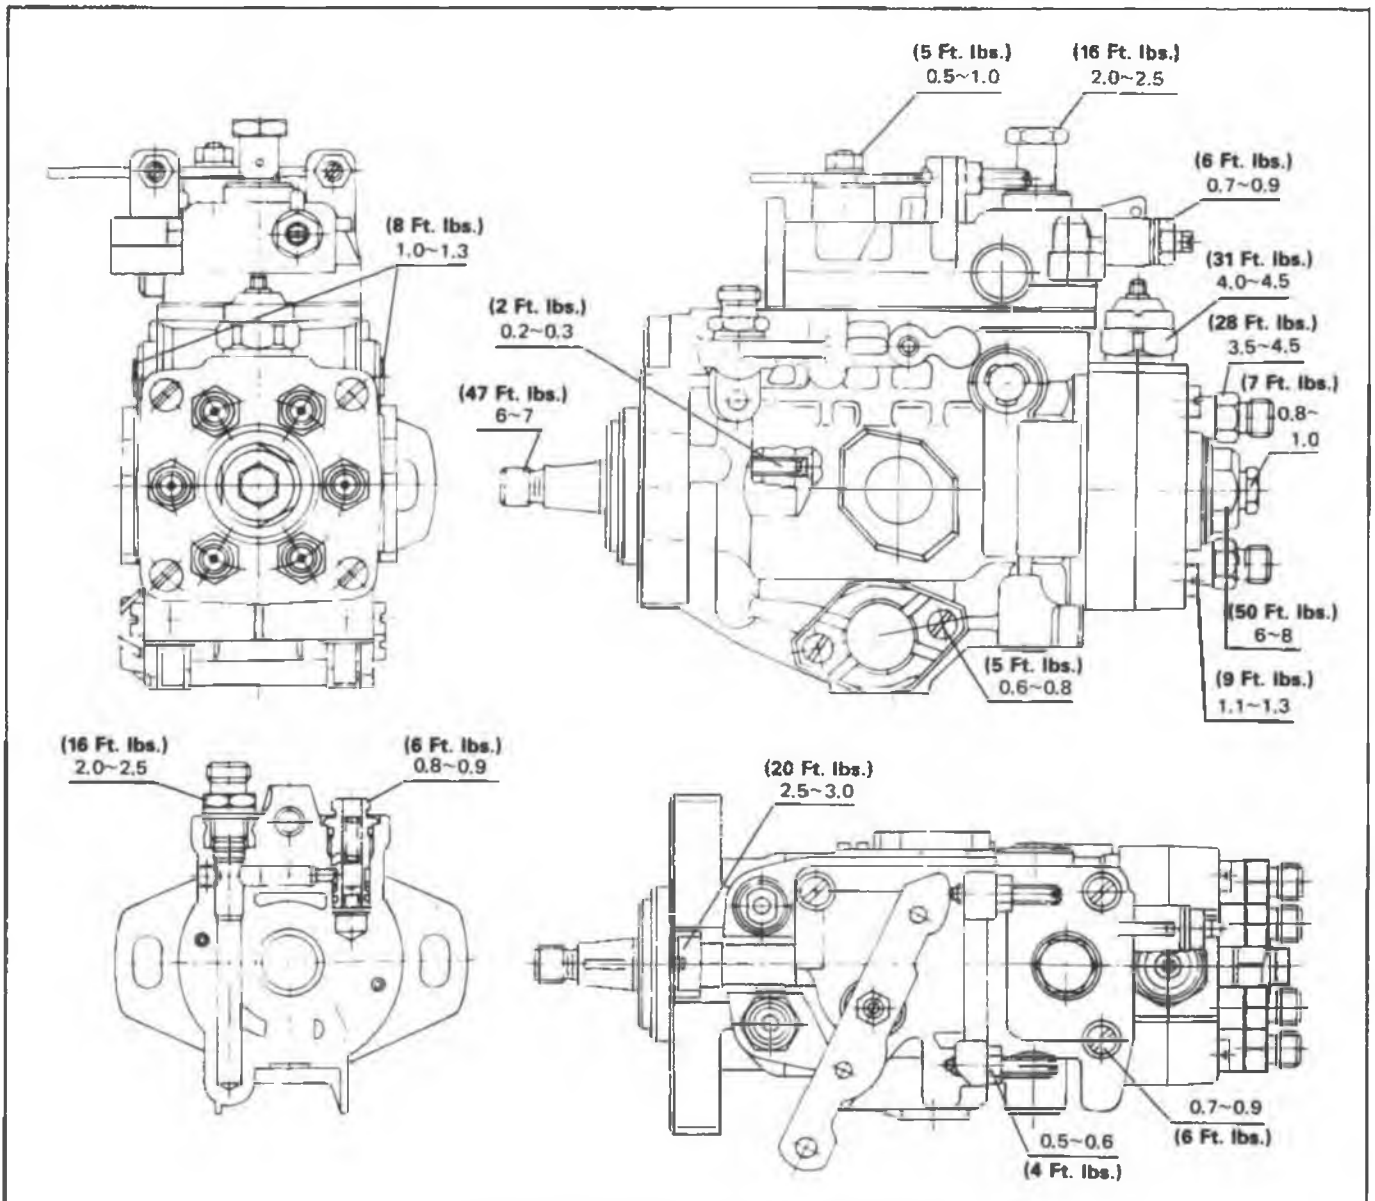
Diesel Kiki VE Injection Pump Torque Values
